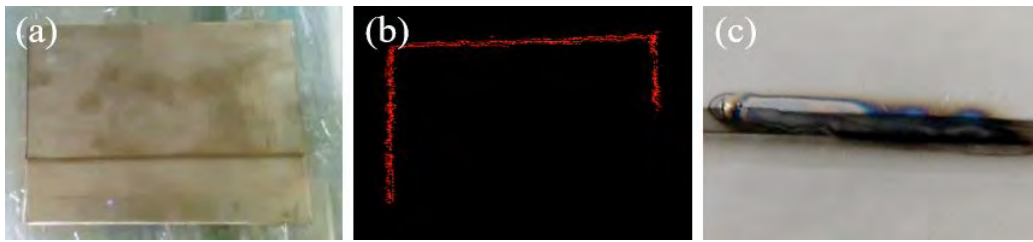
Some faulty examples. (a)–(b) Seam between sheet metal workpieces cannot be located as the depth difference is small; (c) Due to the limited angle of view from the system, the welding torch is hard to control with the system.
